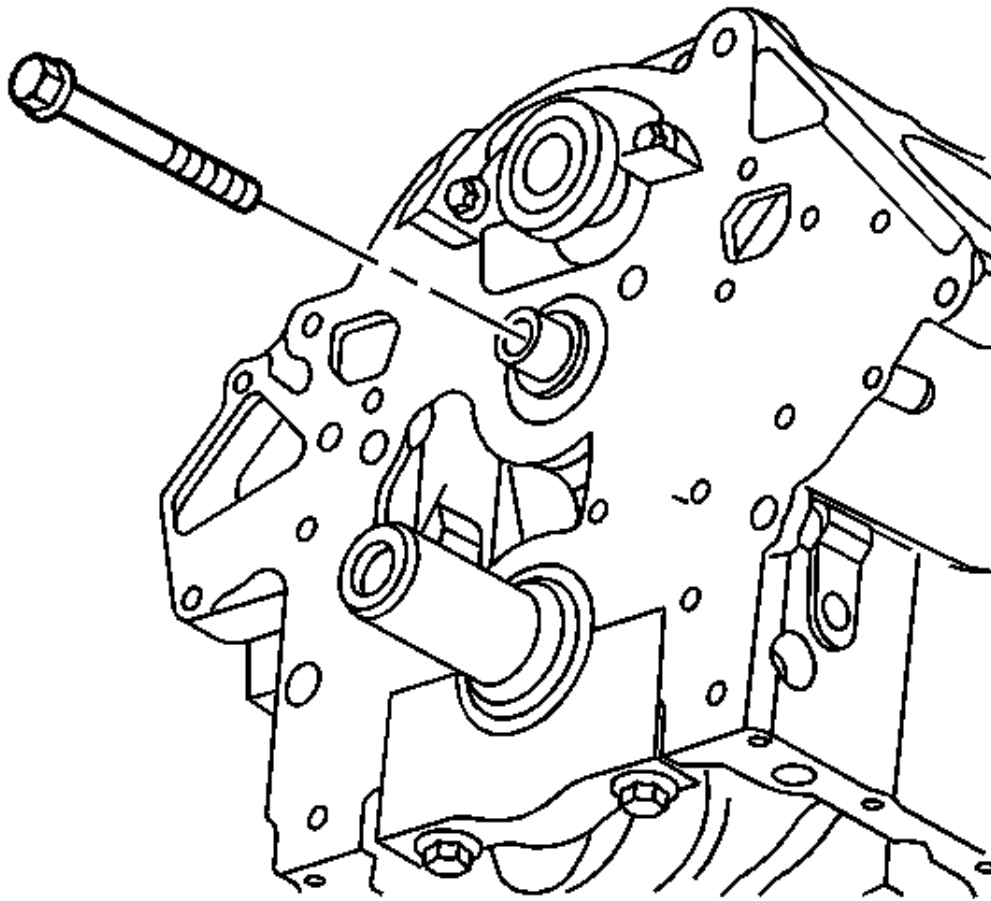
Installing Bolt Into Camshaft Front Bolt Hole
